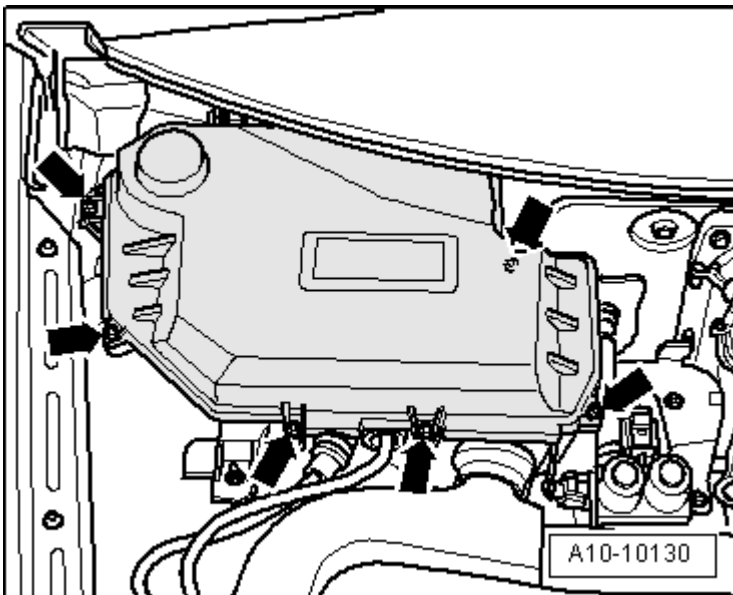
Removing Bolts And Cover For E-Box At Right In Engine Compartment
